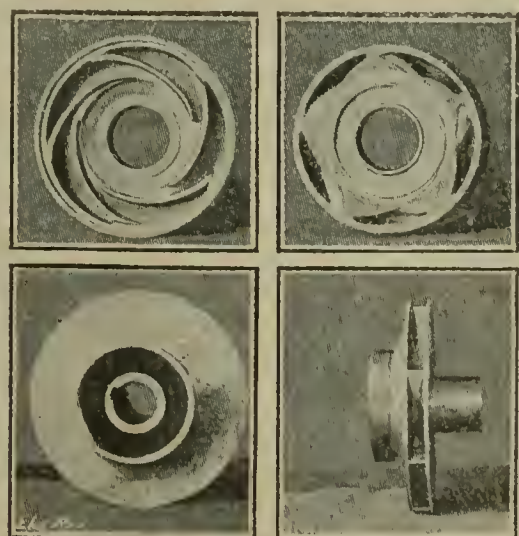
GUIDE VANES AND IMPELLER OF PUMP.
